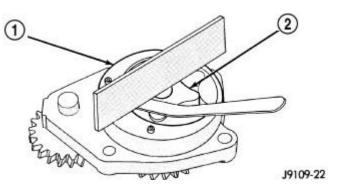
Measuring Gerotor To Port Plate Clearance Courtesy of CHRYSLER GROUP, LLC
